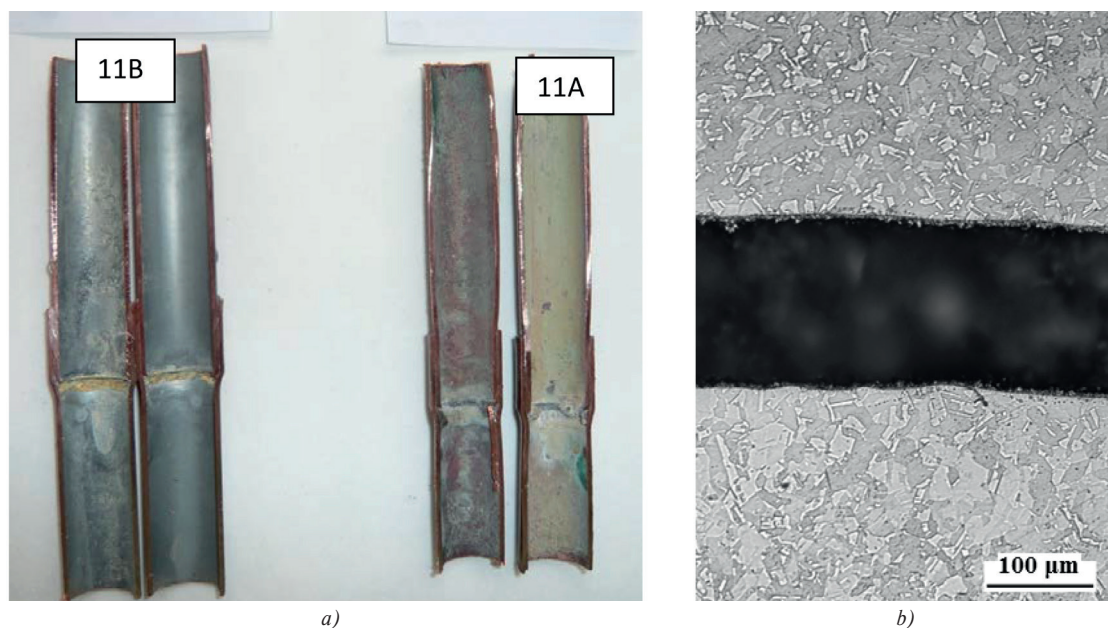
Character of corrosion in the locality with hard soldering joints
